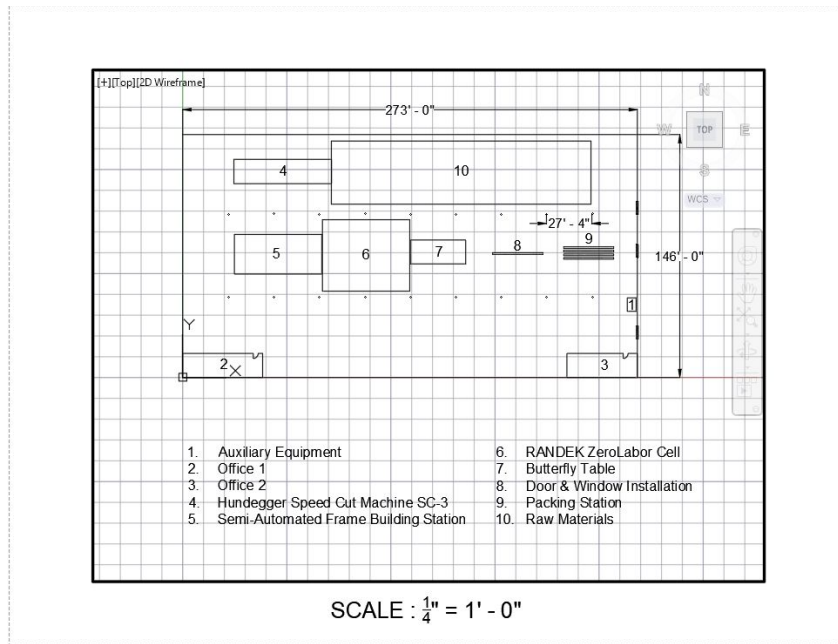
Suggested Monson Facility System Layout I (Not to Scale)
